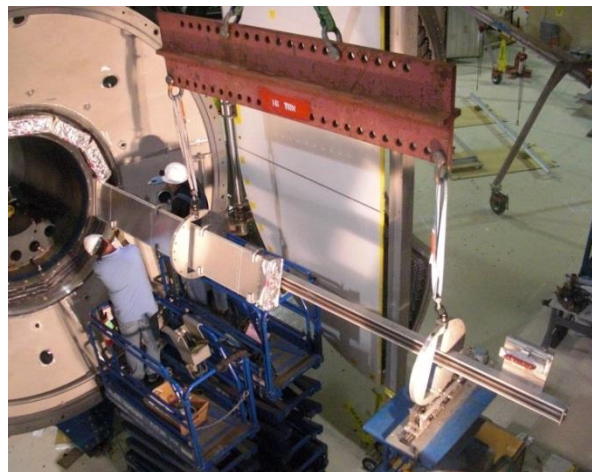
Showing bar box and special lifting fixture, in use during BaBar Detector Assembly
